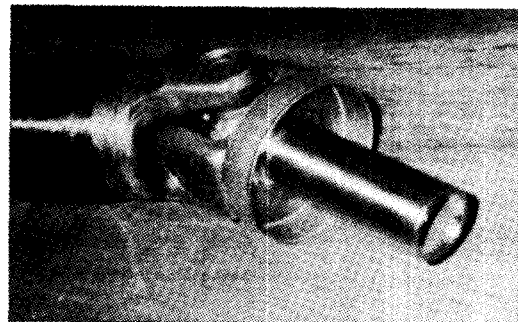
Universal Joint and Spline of Composite Propeller Shaft
